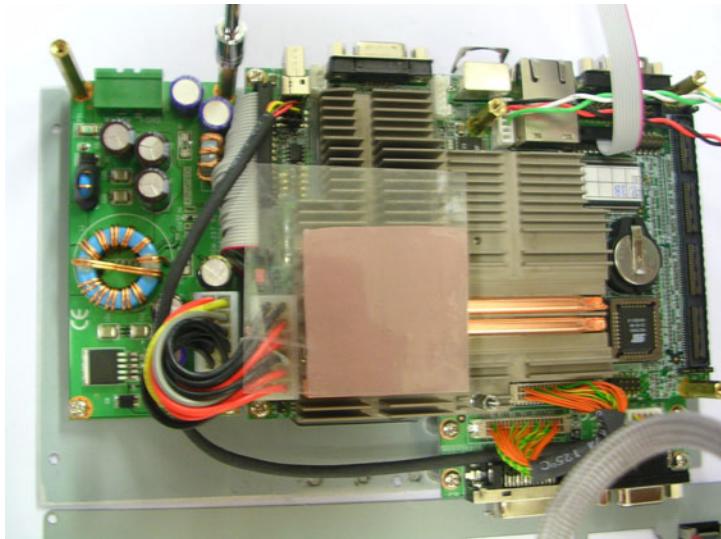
The System with the AMO-3731 Module I/O board removed
